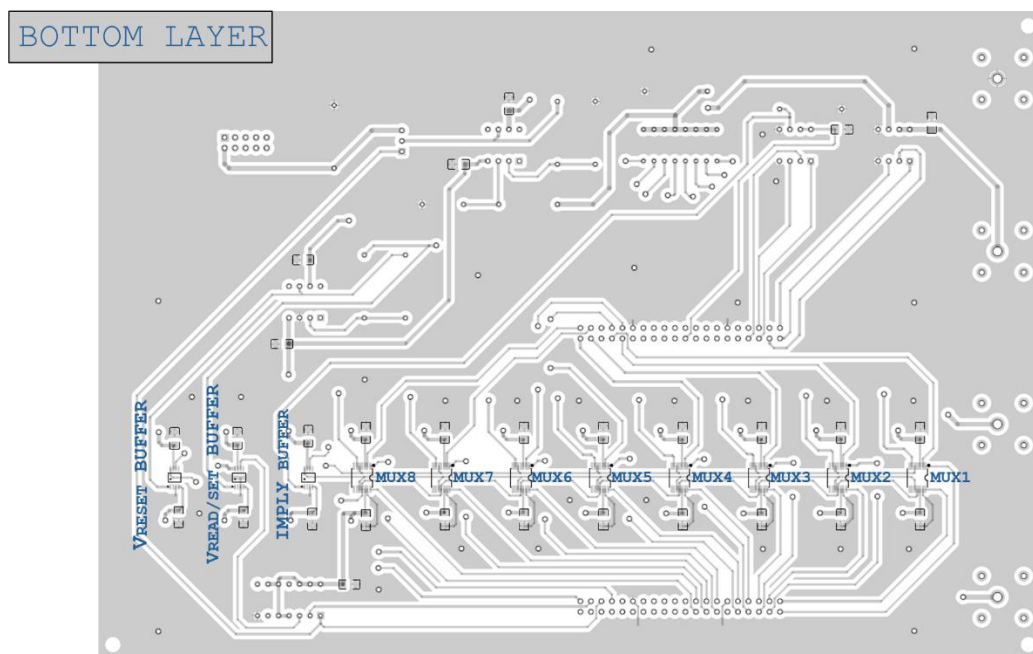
BOTTOM LAYER OF THE PCB DESIGN.
